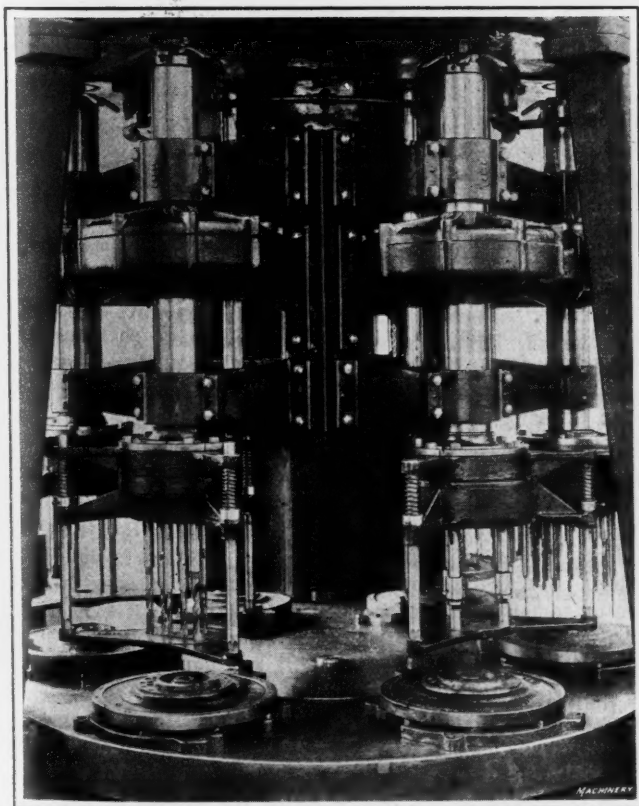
Drill Heads equipped with Tools for Drilling and Reaming Operations
